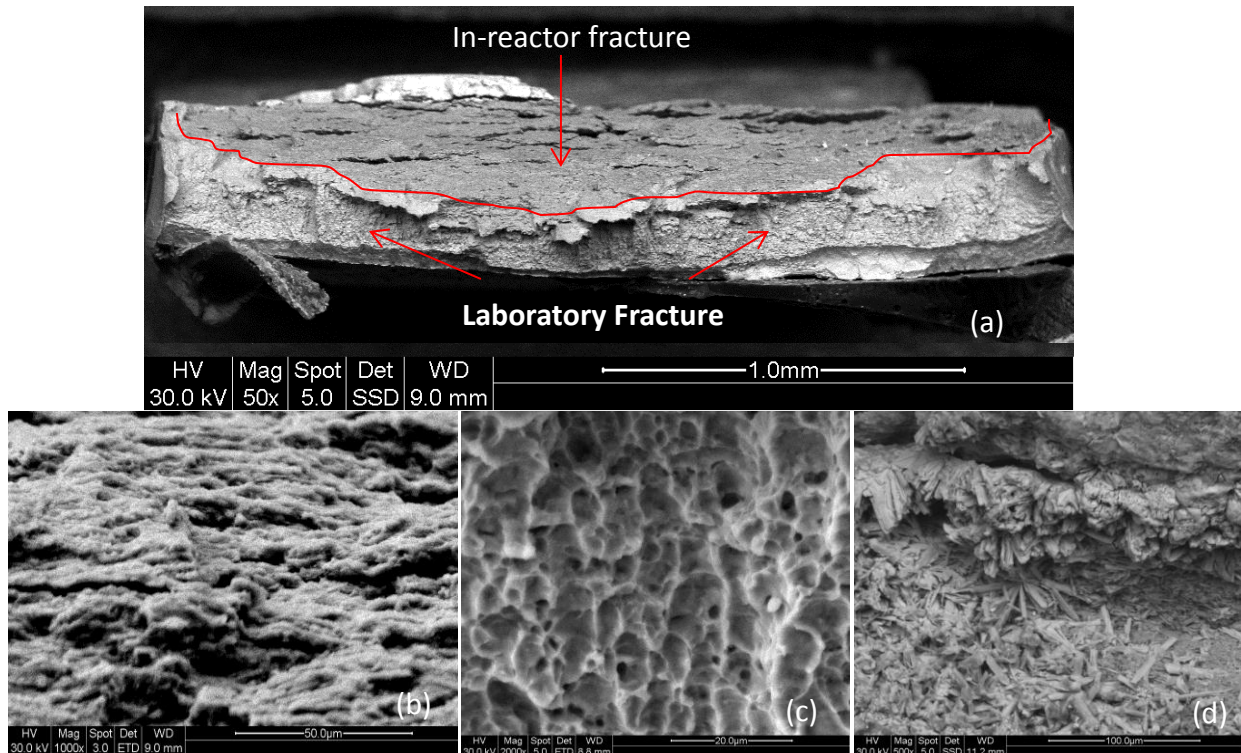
(a) SEM picture of the fracture surface of the clad with partially penetrated crack. Magnified view of the region of (b) in-reactor fracture (c) Laboratory fracture (d) Oxide morphology on the through-wall cracked clad.
